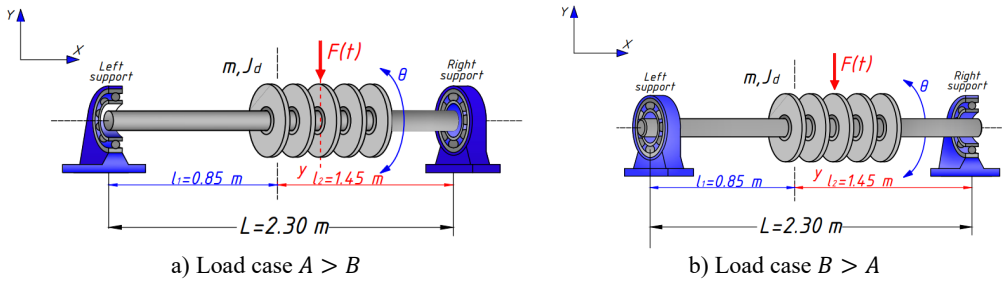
Three-dimensional model of the sawing cylinder shaft system with elastic support elements.
